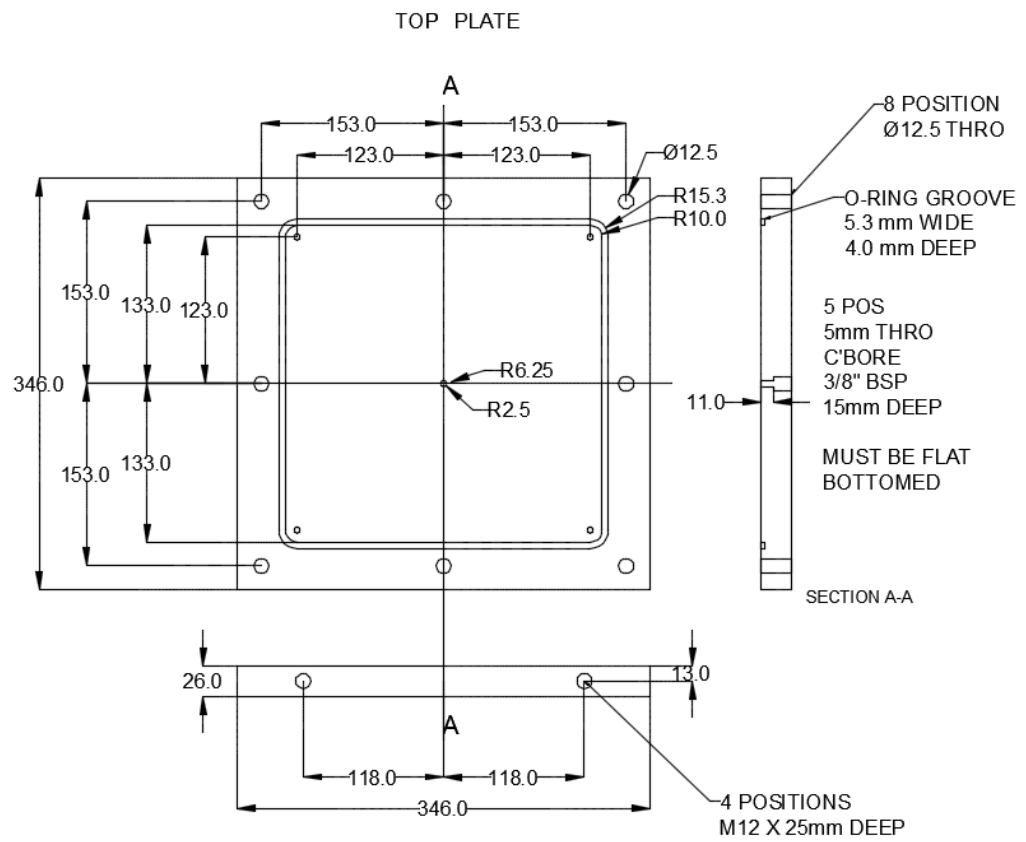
Sketch showing the dimensions of top plate of mild steel mould. All dimensions are in mm.
